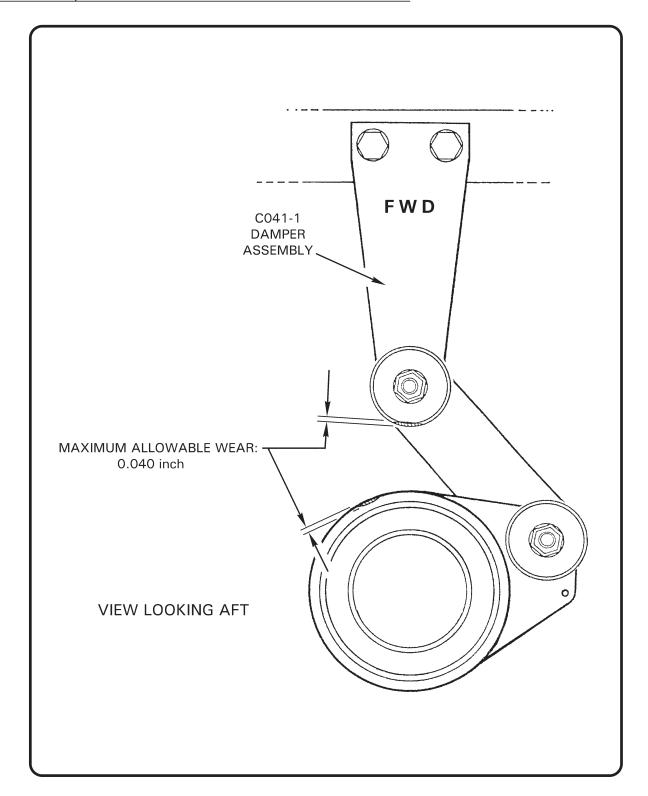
TAIL ROTOR DRIVE SHAFT DAMPER BEARING INSPECTION
